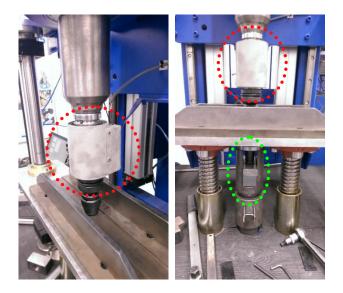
The torque meter are marked with a red circle. A tool to turn the nut is mounted on the torque meter, while the green circle marks the tool to hold the head of the bolt.
